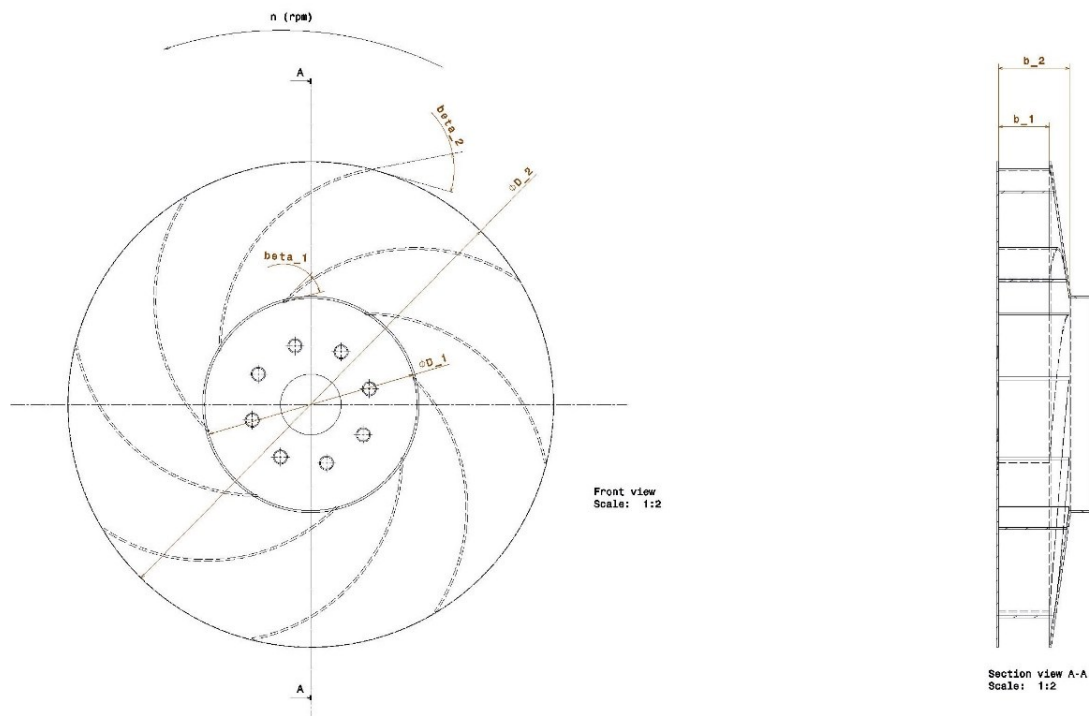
Back curved centrifugal impeller's mechanical drawing with front and side view. The design parameters are inserted in the dimensioning of each feature.
